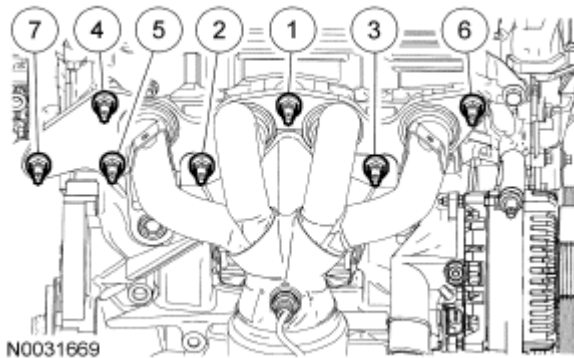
Tightening Exhaust Manifold Nuts In Sequence
